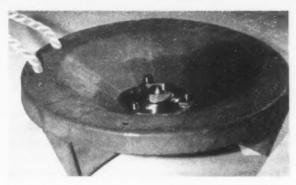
This titanium, 81 mm mortar base plate has been adopted by Ordnance Corps as a standard item. An all welded assembly, the base plate contains 3 forgings, 2 of which are fully machined. The plate in titanium weighs 22½ lb and replaces a steel plate weighing 48 lb. RC-70 0.100 in. thick is cold flanged and hot dished at 1100°F, to form the top section. The three locking bolts are also of titanium.
